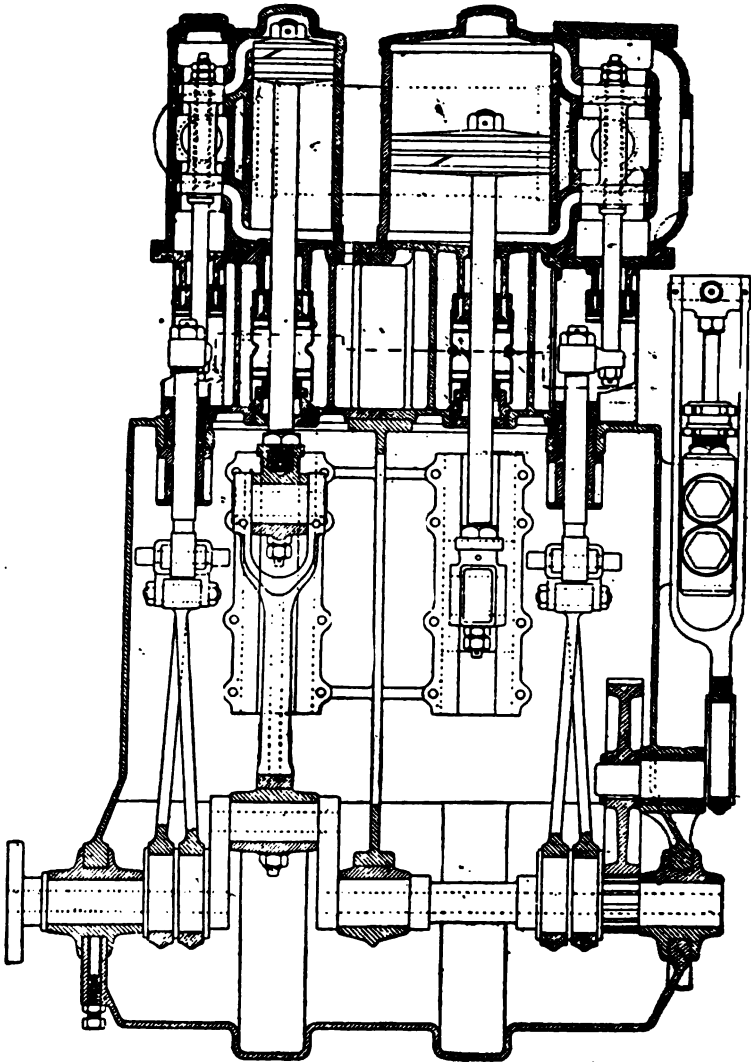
The "Lifu" Compound Steam Engine for heavy vehicle use. This section is drawn through the centre of the cylindrical steam chests, which, as in the Thornycroft engine (Fig. 273), are below and at the sides of the steam cylinders. The appearance of eccentricity in the attachment of the piston rods may thus be understood.
